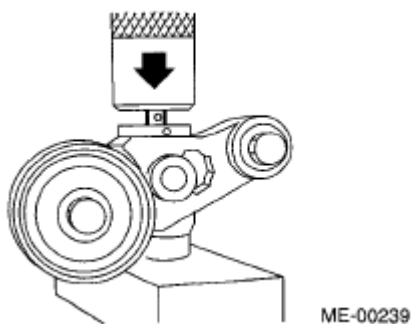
Pushing In Adjuster Rod Until Adjuster Rod Is Aligned With Stopper Pin Hole In Cylinder
